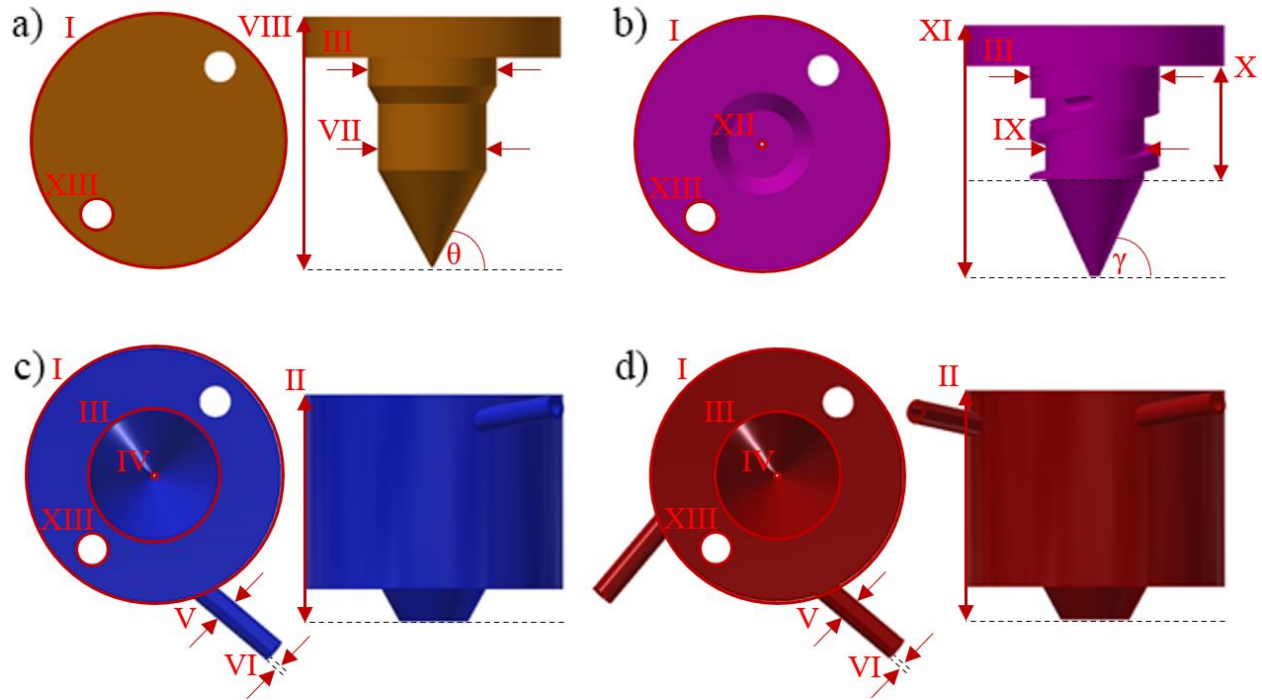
Detailed Design of Aluminum Prototype Components a) Plug b) Core c) Head 1 d) Head 2
